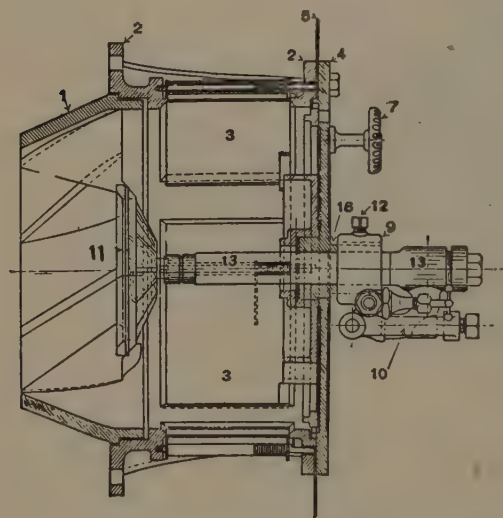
Babcock & Wilcox Mechanical Atomizing Burner. 1. Conical casting. 2. Register casting. 3. Automatic doors for controlling air supply. 4. Cover plates. 5. Radiator guard. 7. Handle for rotating air doors. 11. Conical shaped impeller plate for regulating distribution of air at burner nozzle. 13. Mechanical atomizer.
